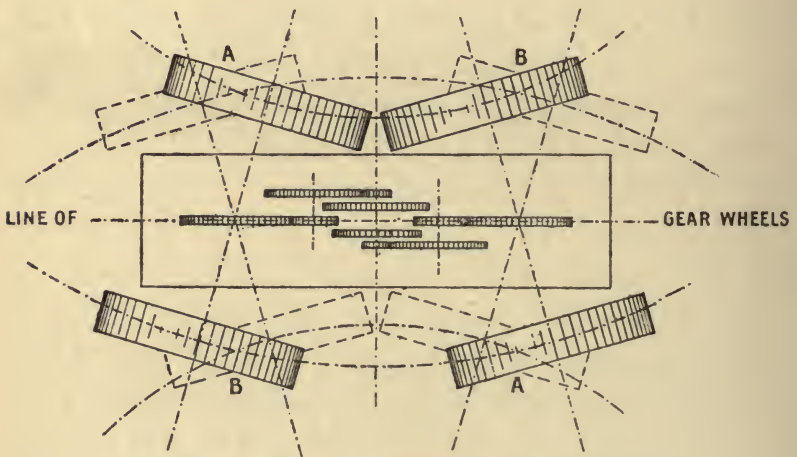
Plan of Frame of Engine with Boiler removed.
